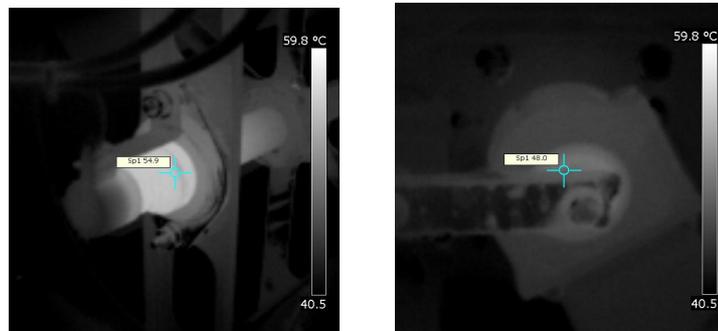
Measurement of bearing of the axial fan and drive of sieving mechanism
